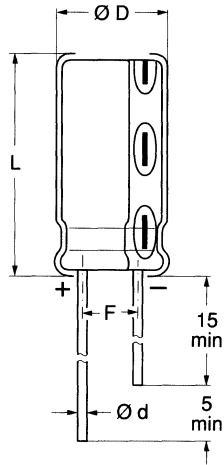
Form CA, long leads; see Table 2 for dimensions.
